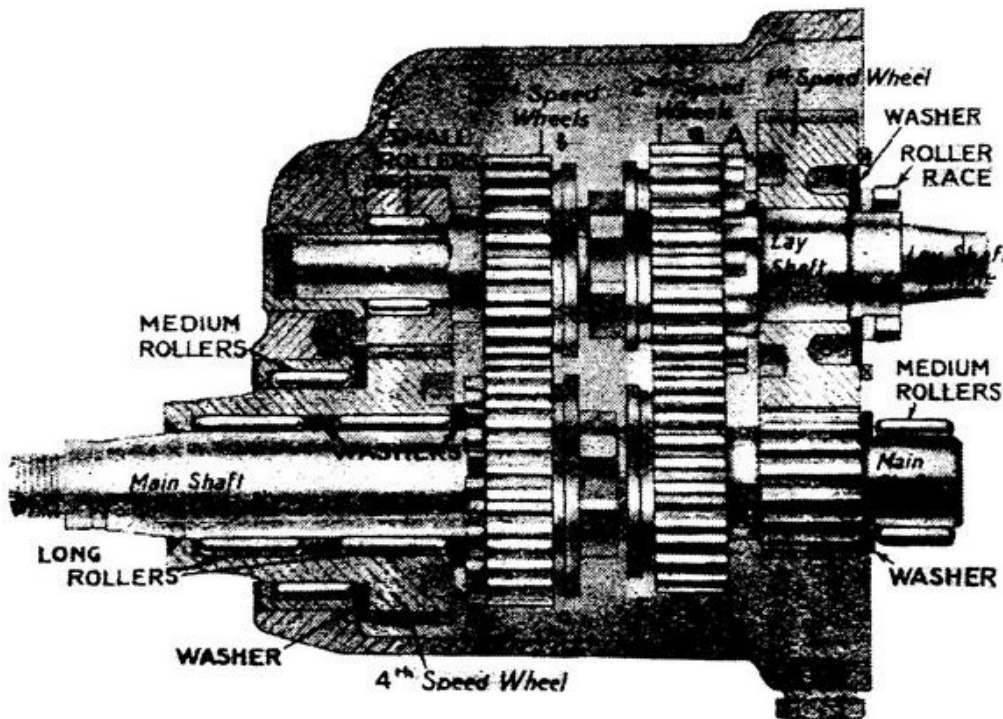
THE FOUR SPEED GEAR ASSEMBLY.
